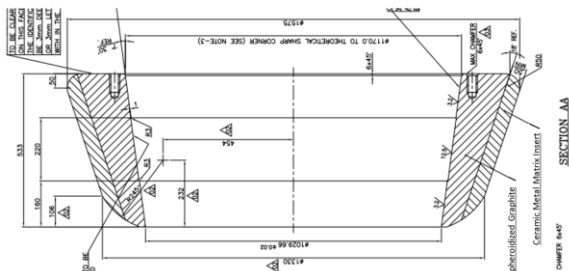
Existing Ni Hard grinding roll drawing to obtain the dimensional requirement.
